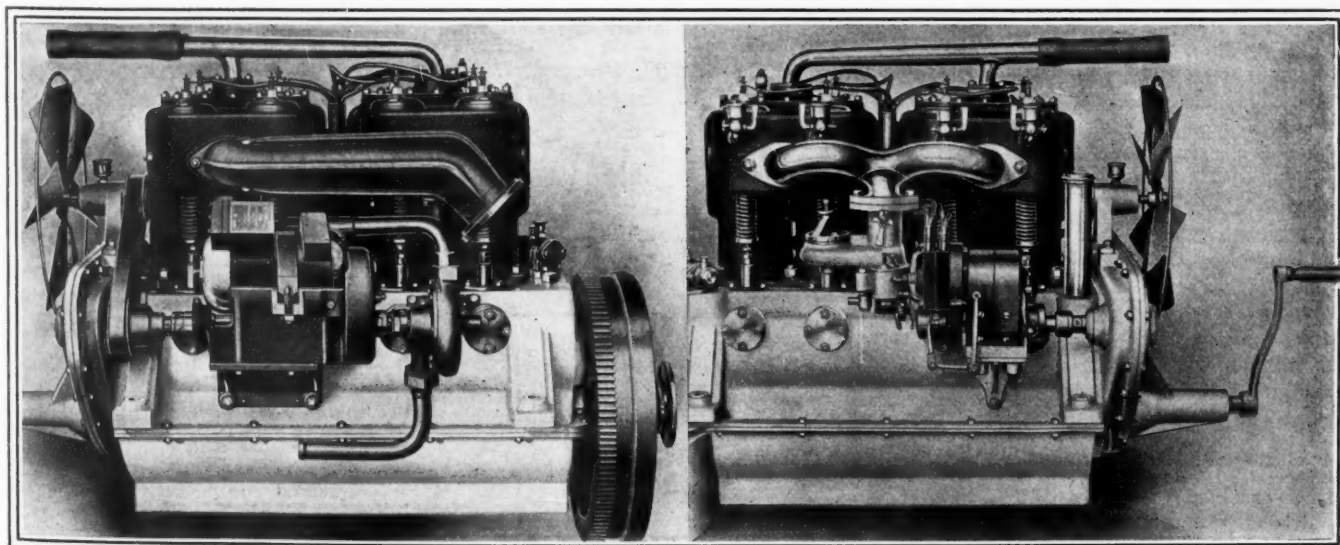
A view of each side of the Mercer 4.5 by 5-inch motor, which is required to show a dynamometer pull of over 58 horsepower at 1700 revolutions per minute. The mounting of the generator on one side and the magneto on the other may be noted
